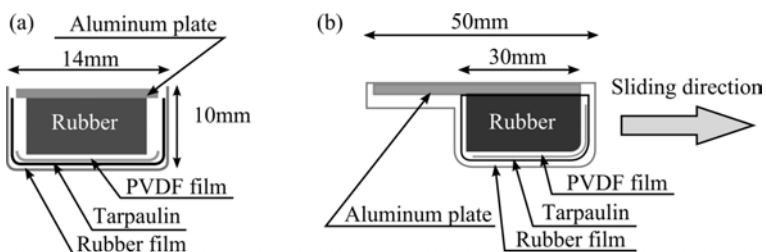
Geometry of the sensor: (a) Front view and (b) side view. Sliding direction of this sensor is right in (b).
